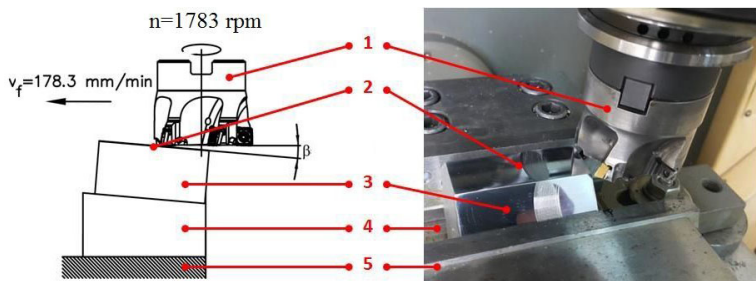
View of the milling process. 1 – tool, 2 – surface to be cut, 3 – workpiece, 4 – wedge, 5 – machine vice, v_f – feed rate, n – spindle speed, β – inclination angle.
